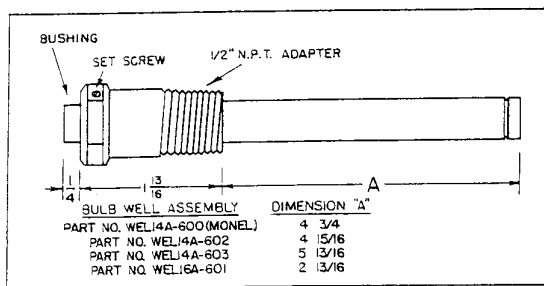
Bulb well for liquid immersion applications where a temperature bulb may be removed without draining tank.
